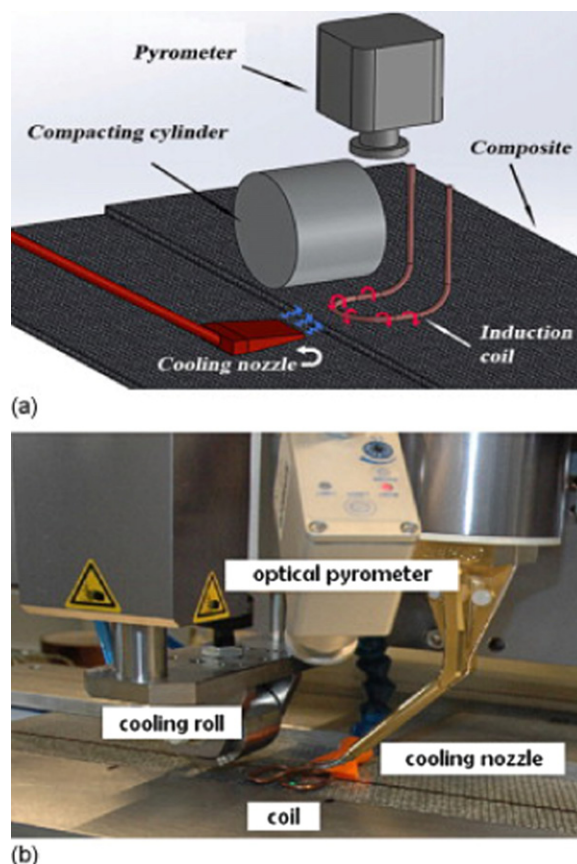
(a) Schematic of the induction welding setup; (b) Induction welding setup. Reproduced from Pappadà, S., *et al.*, 2015. Fabrication of a thermoplastic matrix composite stiffened panel by induction welding. *Aerospace Science and Technology* 43, 314–320.
